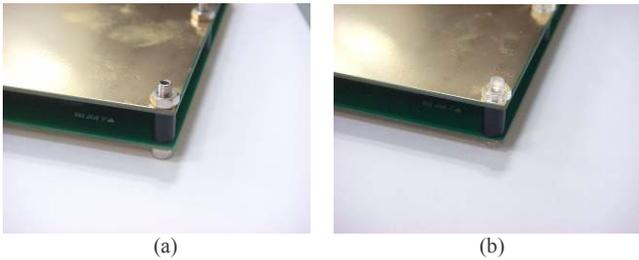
Screw between metal chassis and PCB ground. (a) Metal screw. (b) Plastic screw.
